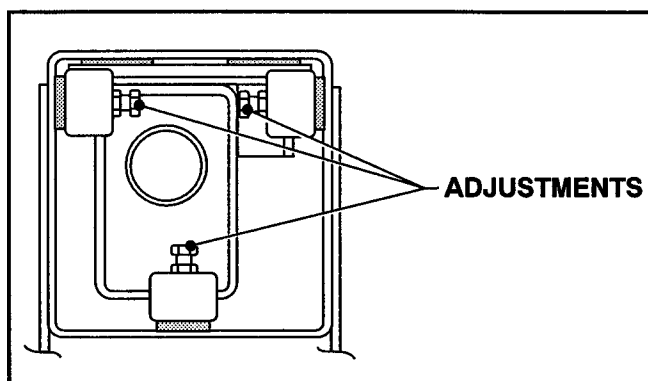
Location Of Components - Aft End Fly Boom Wear Pad Adjustments.
